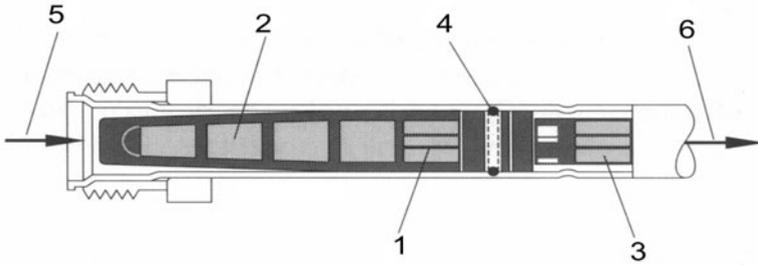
Expansion tube group: 1 expansion tube, 2 entry filter, 3 exit filter, 4 o-ring, 5 entry (from condenser), 6 exit (to evaporator).
